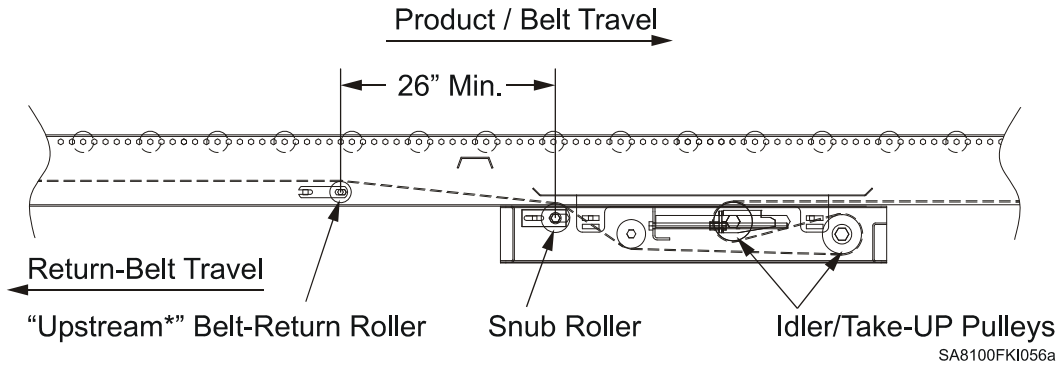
Installing Auxiliary Take-Up (Manual-type shown)
